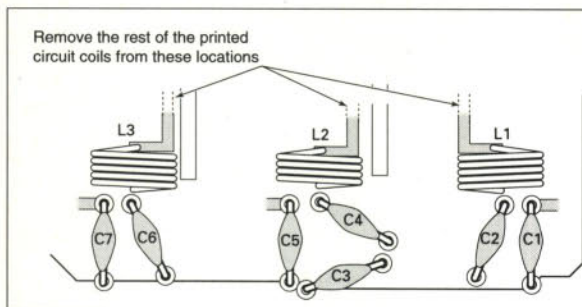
Detailed view of new l.p.f. components. The original inductors are printed circuit types on the p.c.b. and have to be removed (see text).
